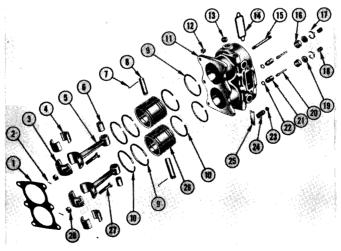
CYLINDER BLOCK, EXPLODED
